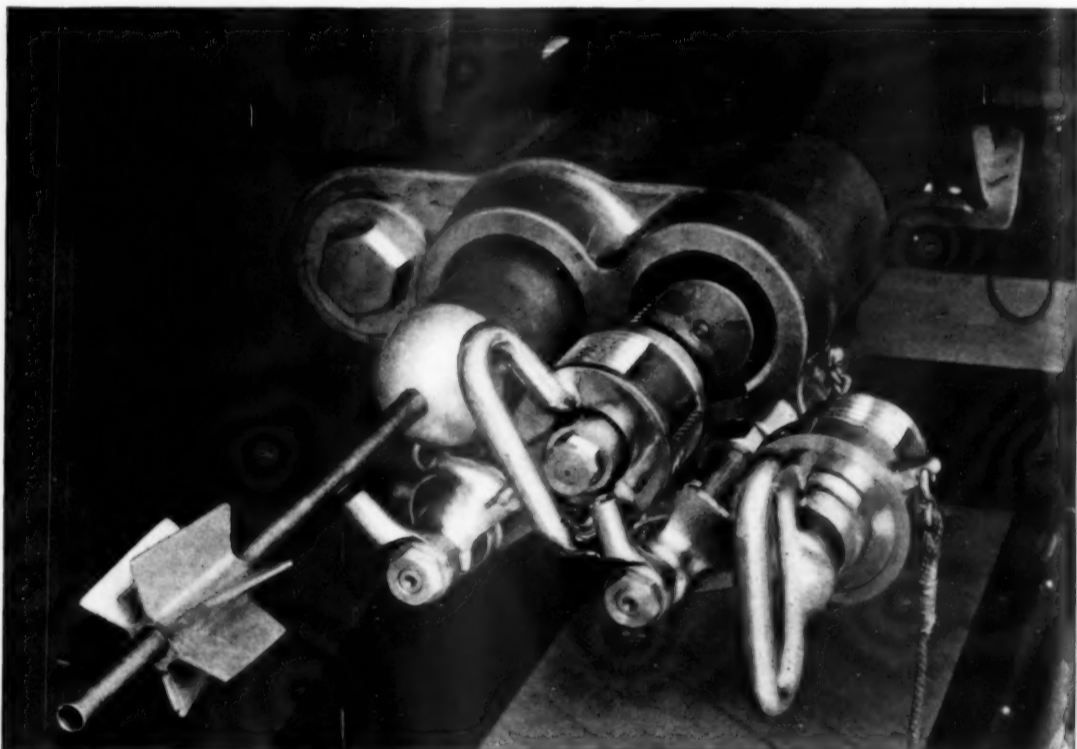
SIMS-DUDLEY PNEUMATIC GUN. BREECH MECHANISM.
